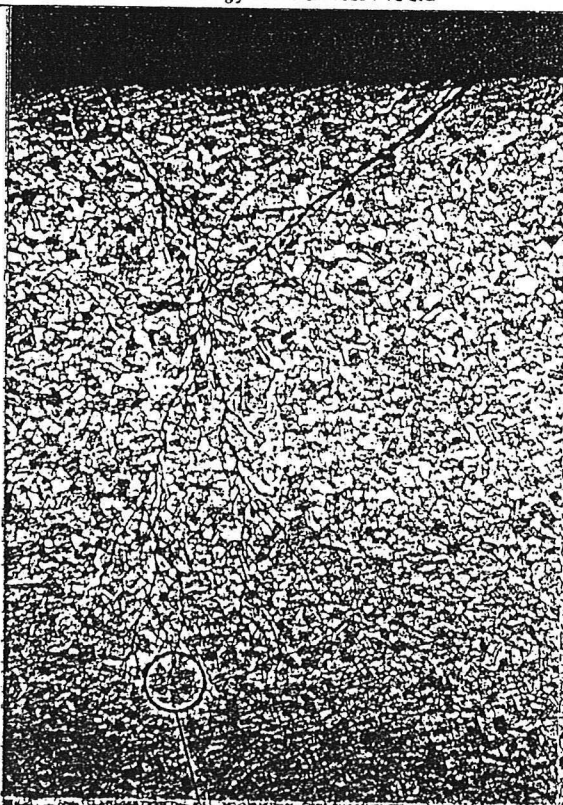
Dye Penetrant Test on as-received sample showing numerous branching cracks on external surface.
